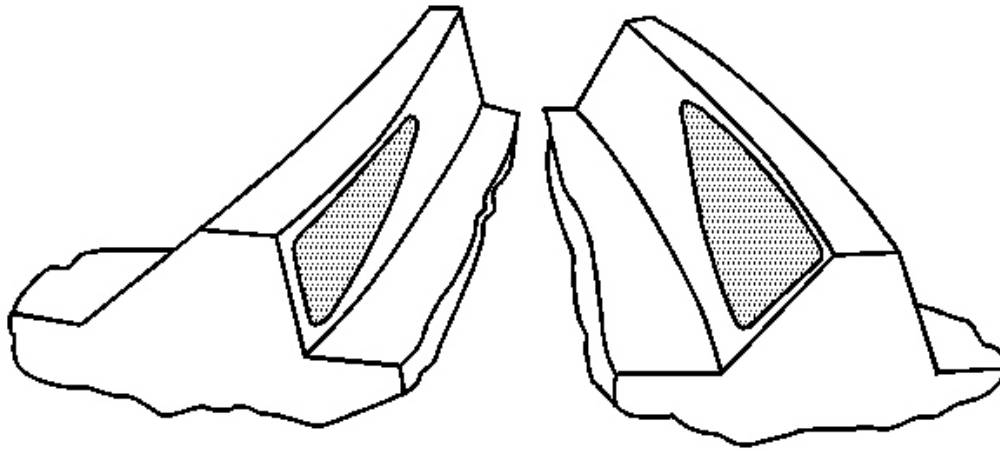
Drive Side Heel - Coast Side Heel Contact Pattern
